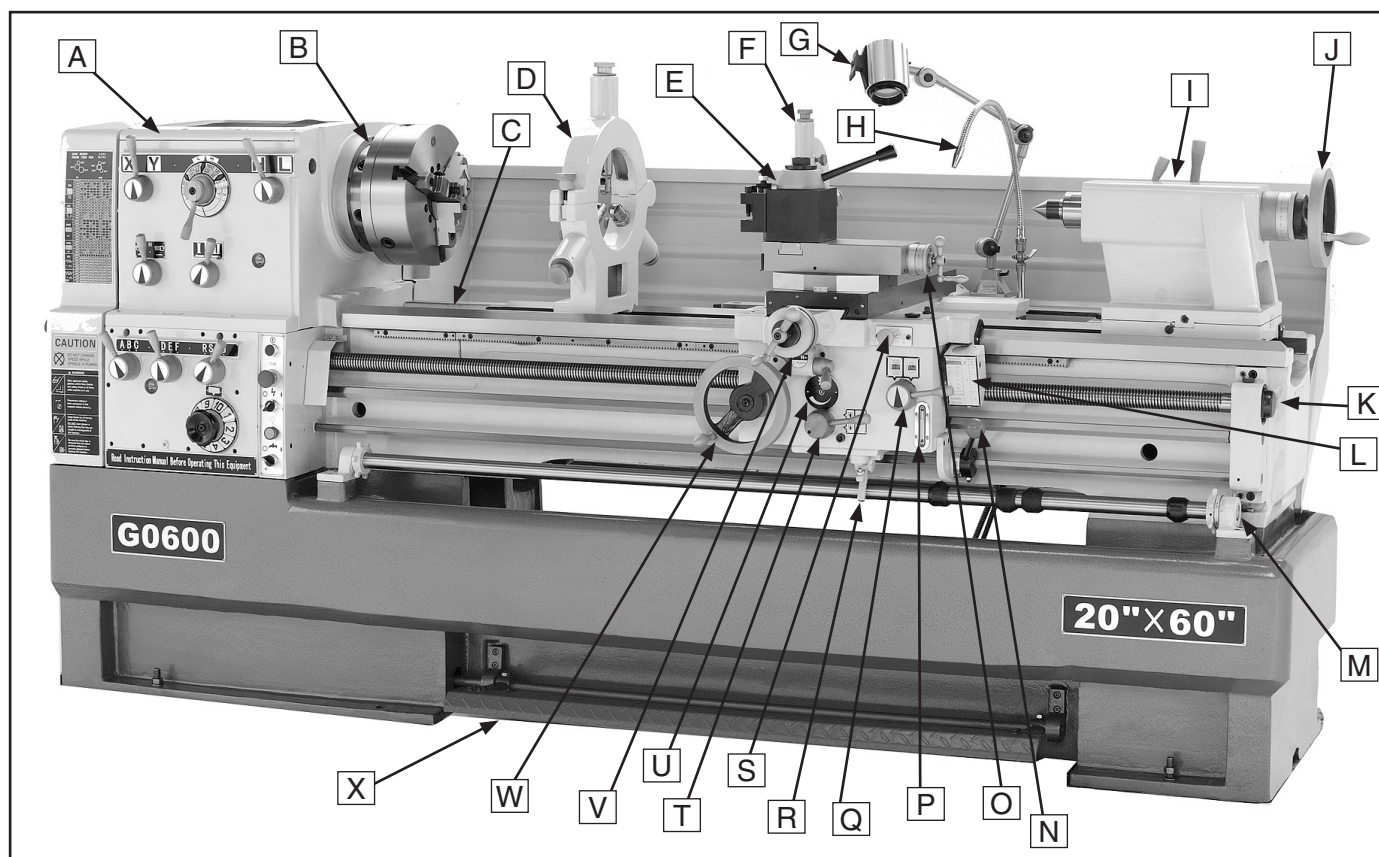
The Model G0600 20" x 60" Big Bore Lathe.
